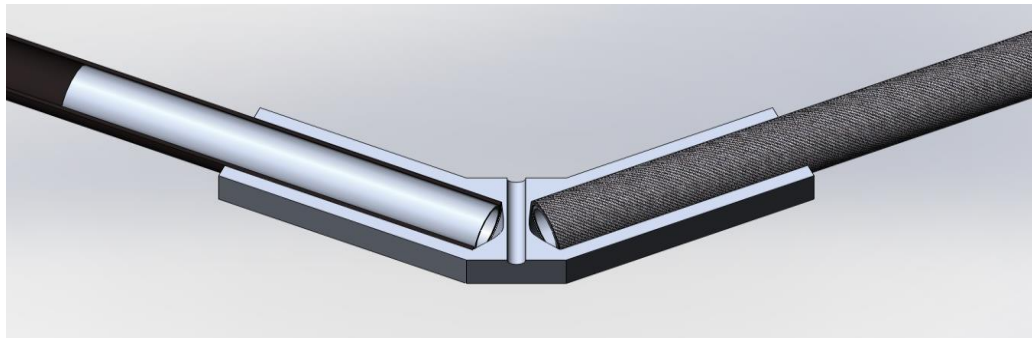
Section View of Aluminum Fitting Showing Wing Spar and Reinforcing Tubes
